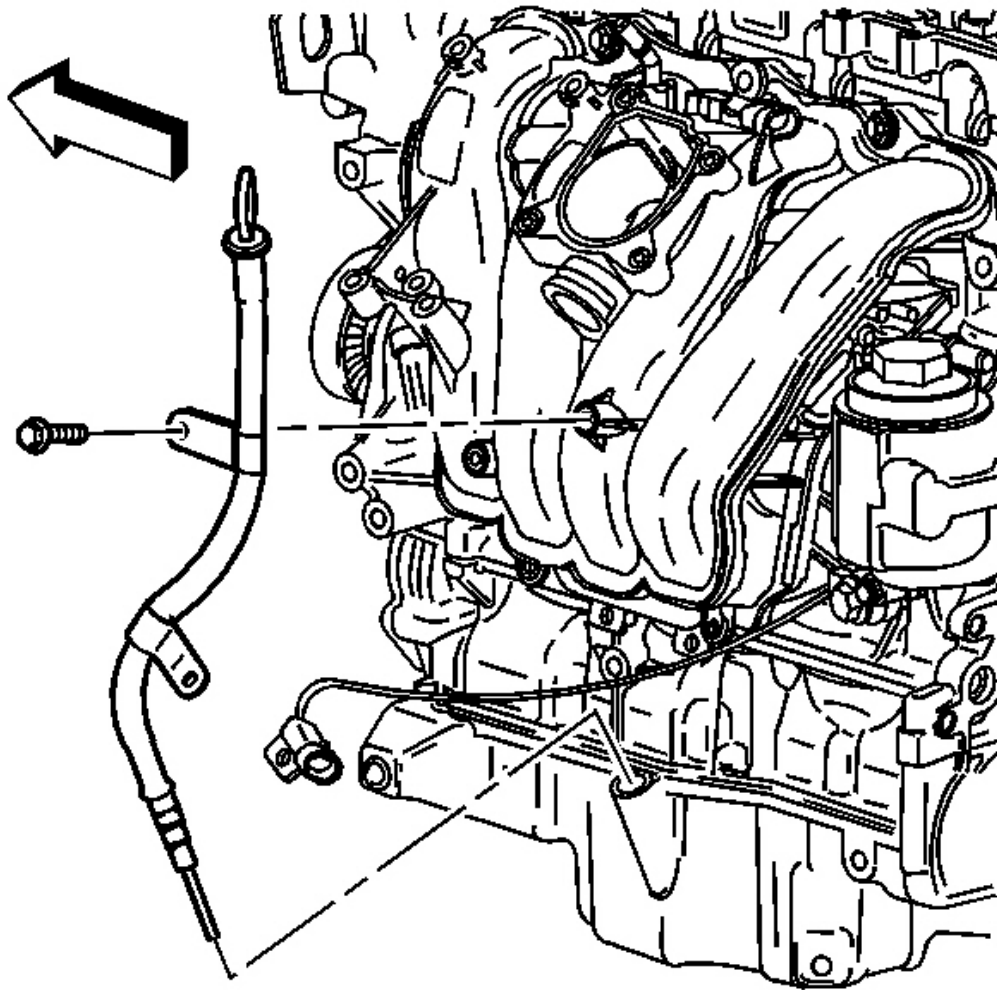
Removing/Installing Oil Level Indicator Tube Assembly & Bolt
